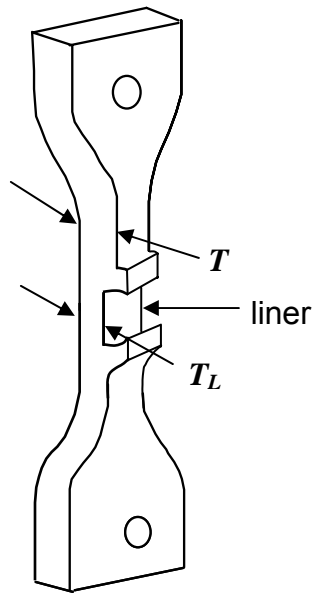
A side-view of a vent hole test specimen with crown part being removed
